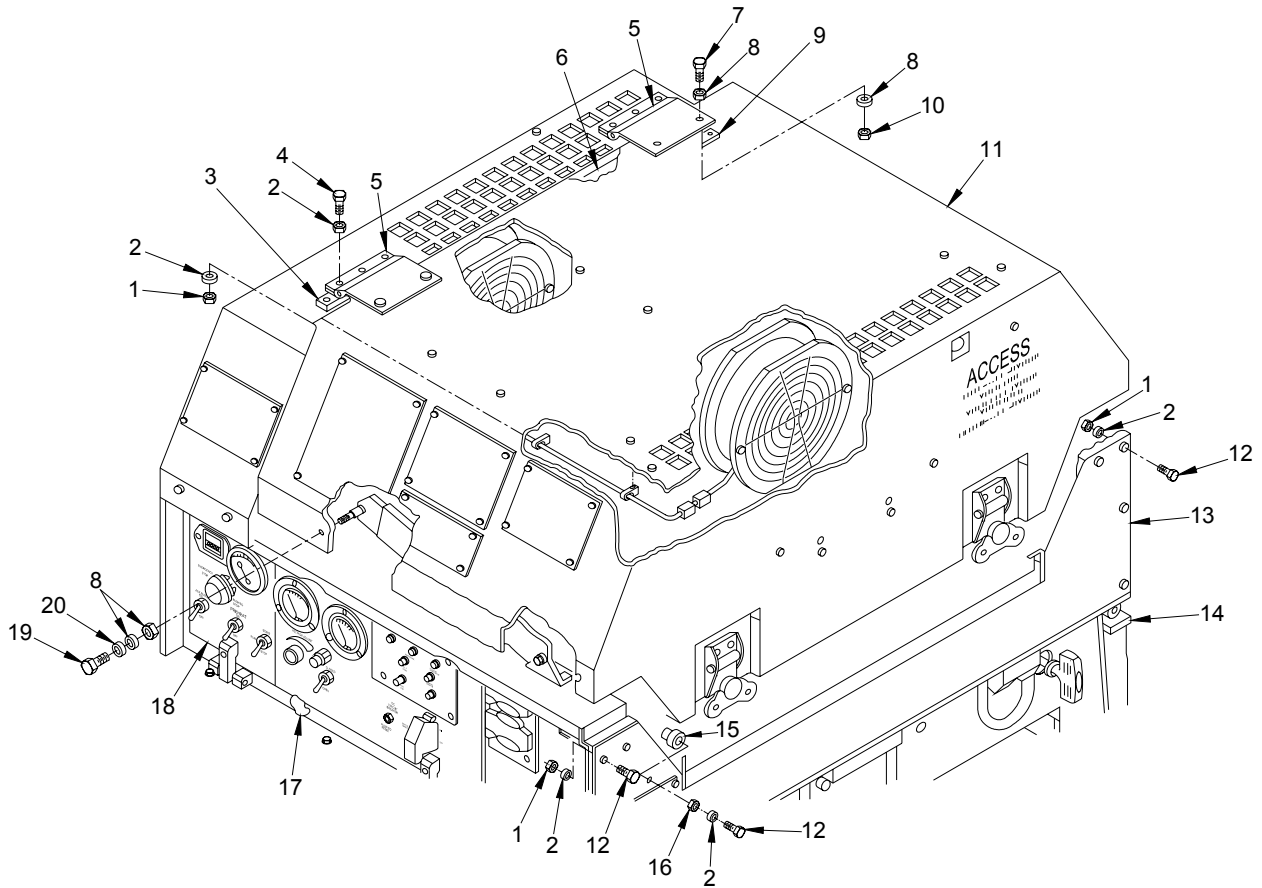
FRAME AND HOUSING ASSEMBLY/MAIN ACCESS COVER
